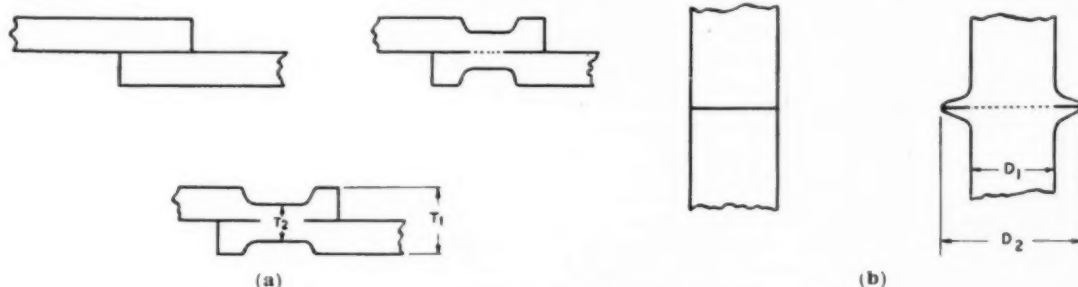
Pressure welding of (a) sheet specimens and (b) cylindrical rod specimens.
